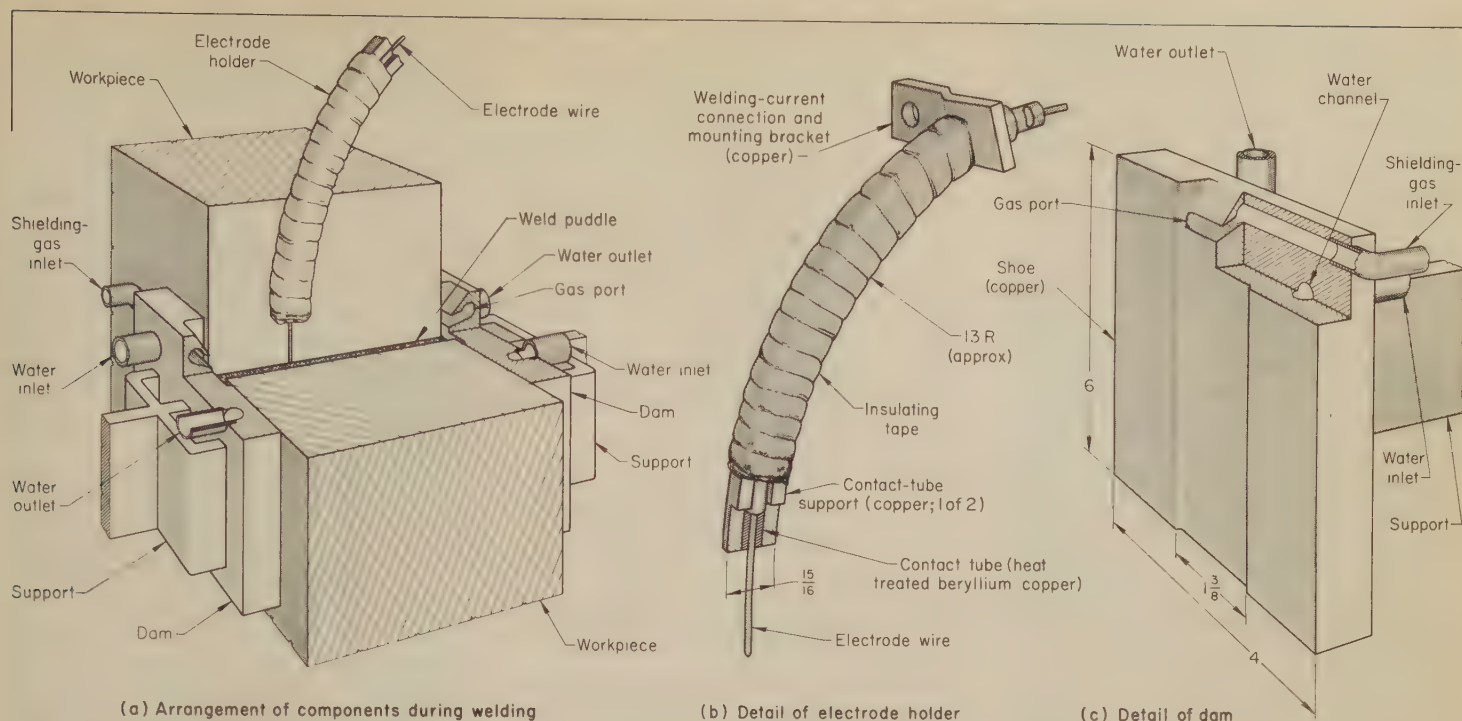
Arrangement and details of essential components of an electrogas welding system employing an insulated electrode holder and dams that incorporate ports for supplying all shielding gas
